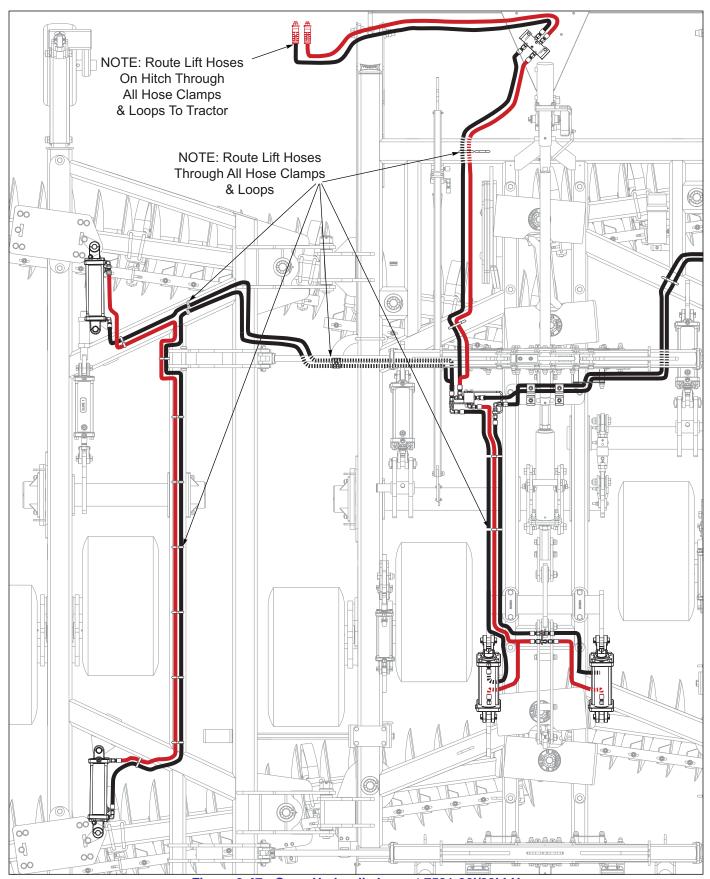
Gang Hydraulic Layout 7531-26'/29' LH
